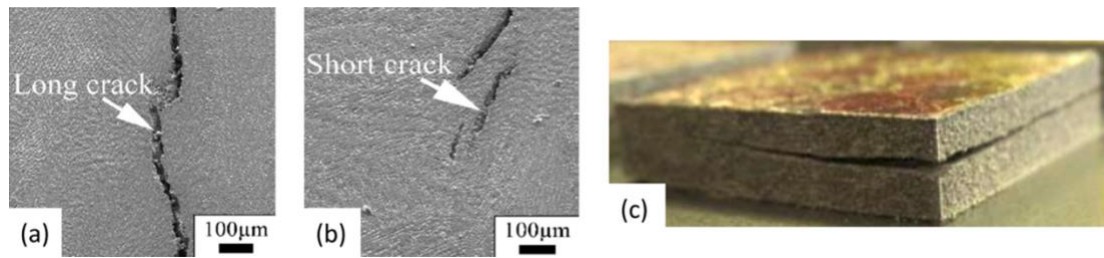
(a) Long crack, (b) short crack, (c) delamination (DebRoy et al., 2018)
